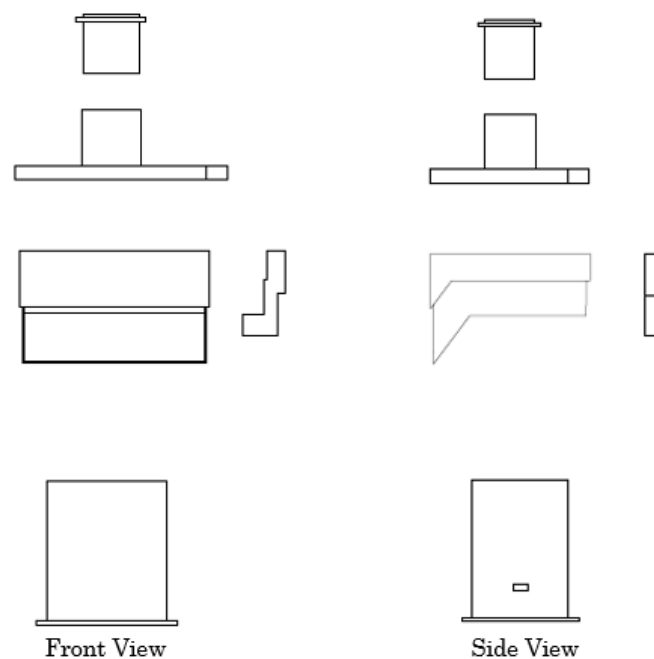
Mucuna slicing machine redesign. (a) Design from front view (b) Design from side view.
